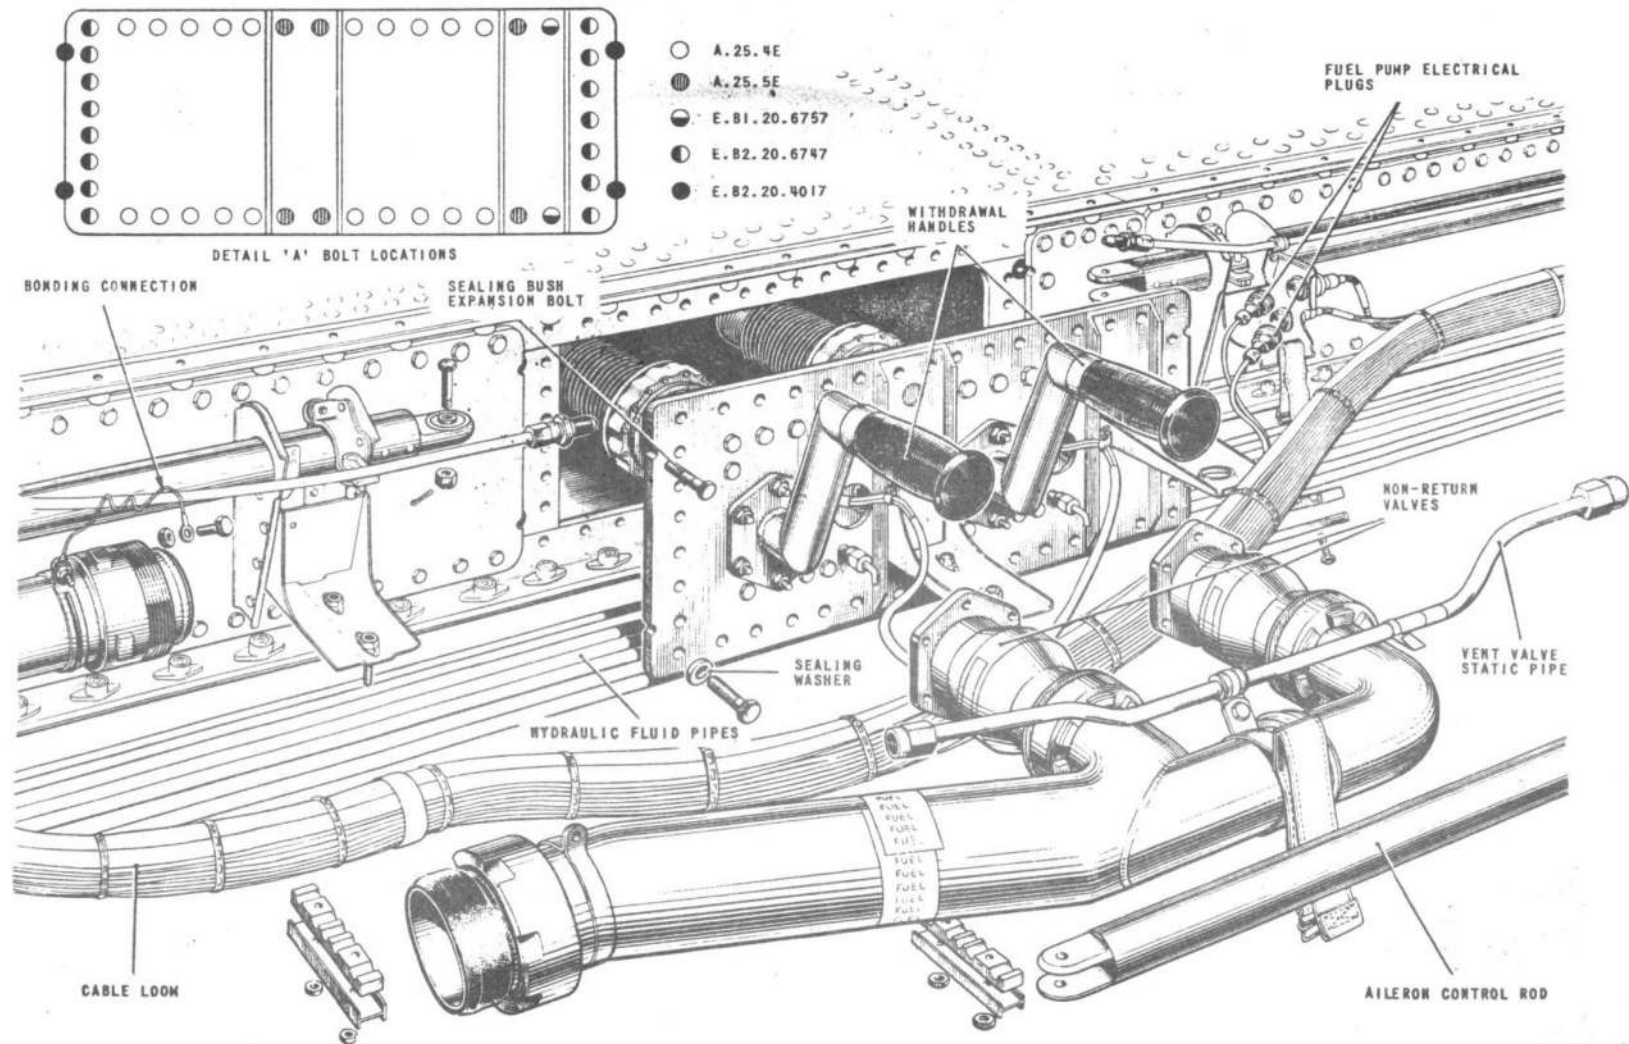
BOOSTER PUMPS-REMOVAL AND ASSEMBLY
